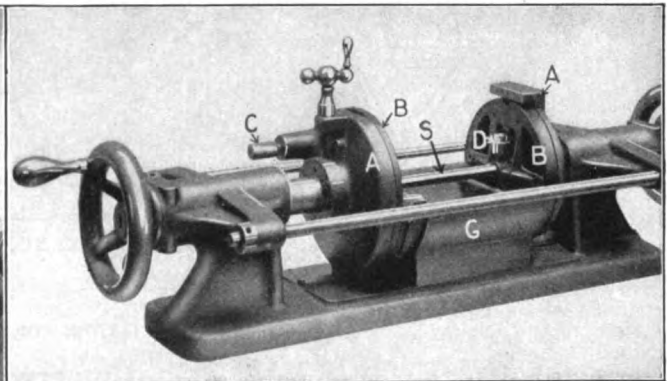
FIXTURE FOR ASSEMBLING HEADS AND SEGMENTS
